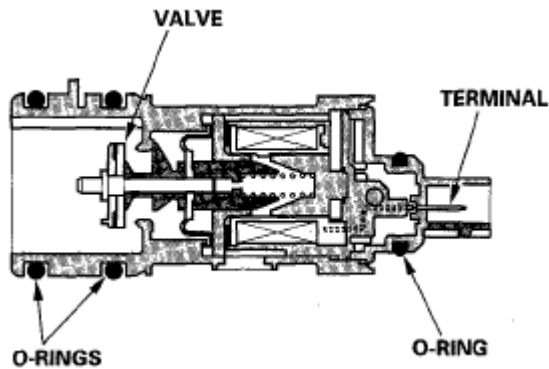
Identifying O-Ring And Valve Of EVAP Canister Vent Shut Valve
